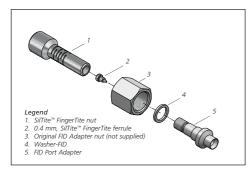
Exploded diagram of the FID detector SilTite™ FingerTite assembly.
